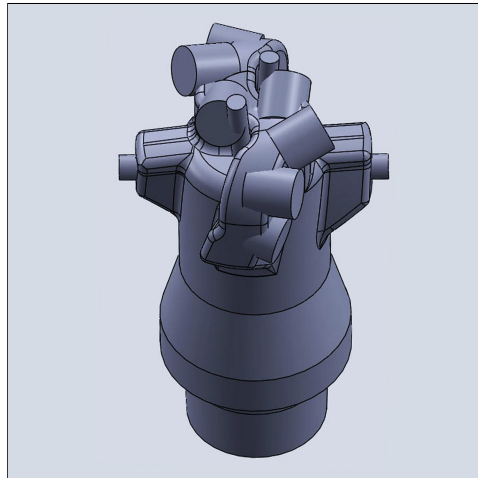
3D model of chamfered bit with placeholders for cutters, metal inserts and nozzles.
